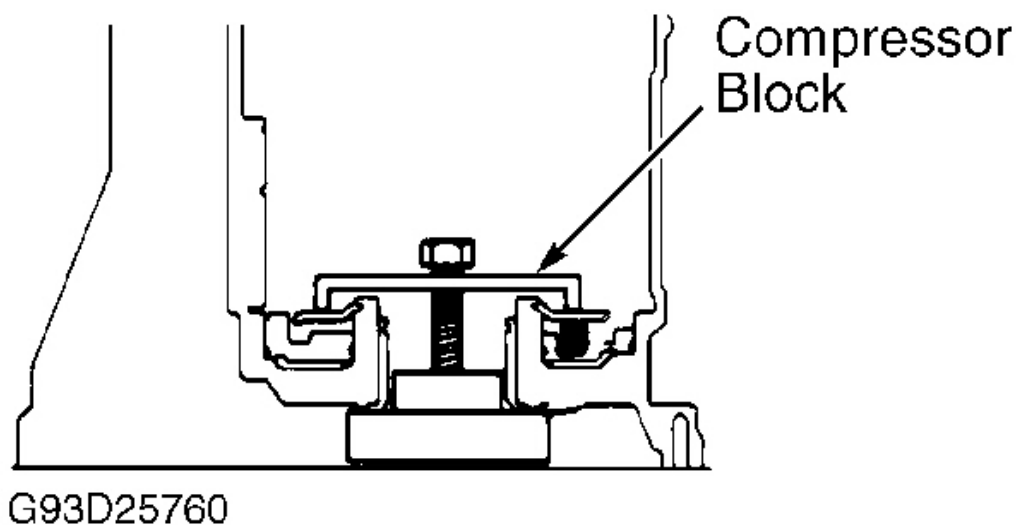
Compressing 1st & Reverse Brake Piston Springs
